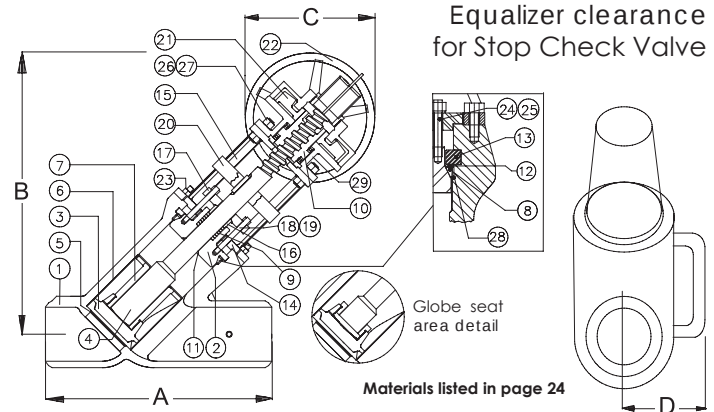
BY Globe, Butt Weld Ends
